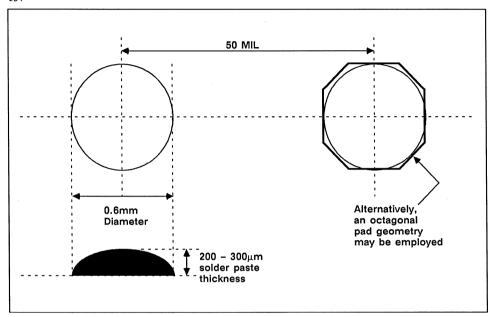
B-17. Solder Pad Design for Surface Mount Pin Grid Arrays
